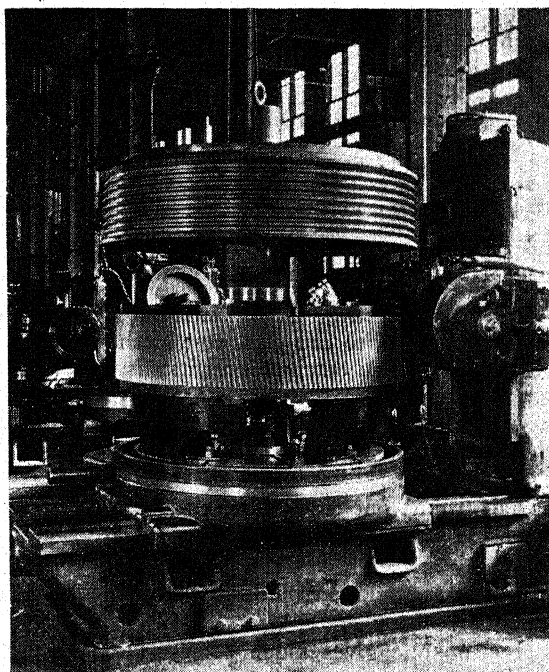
Assembly of gear and sheave-shaft with gear and sheave in place.
